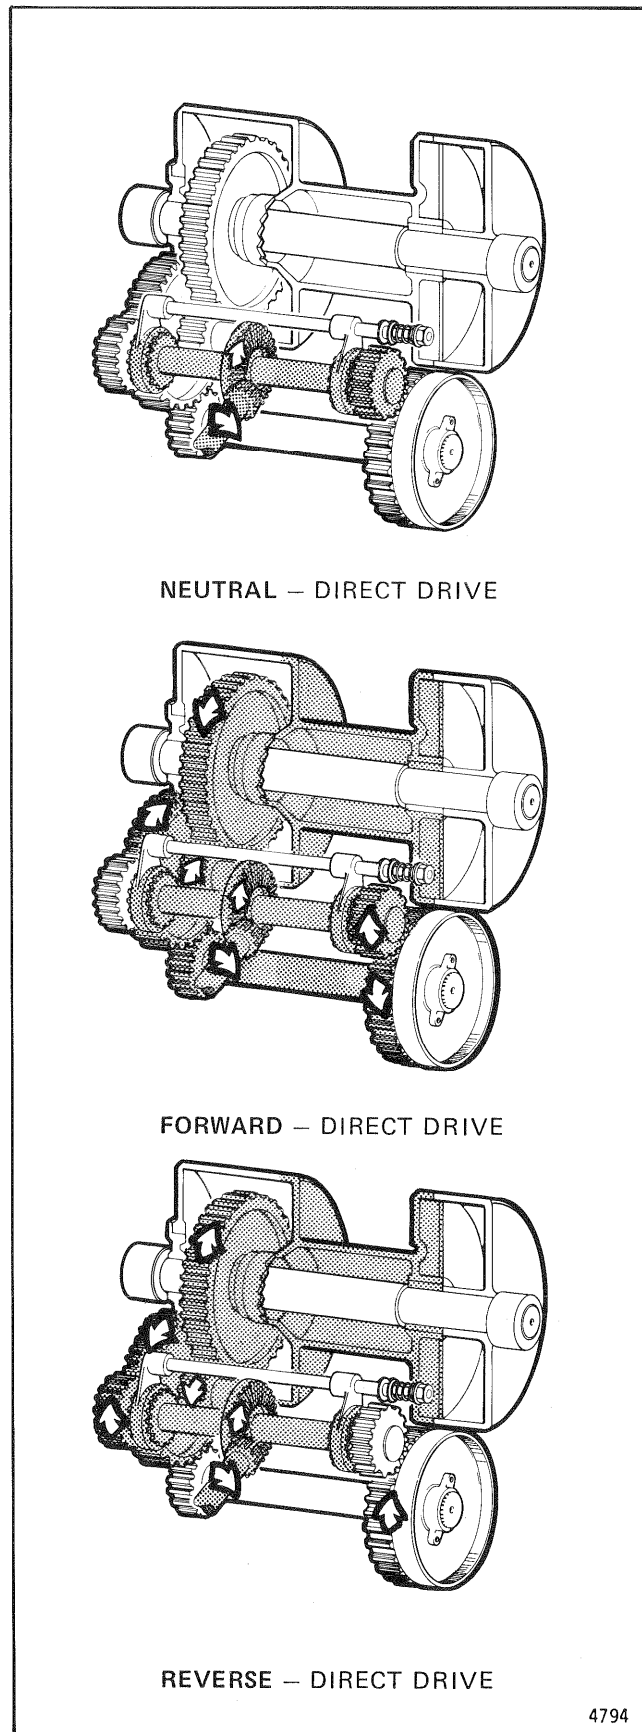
TORQUE TRANSFER, DIRECT DRIVE WINCH
